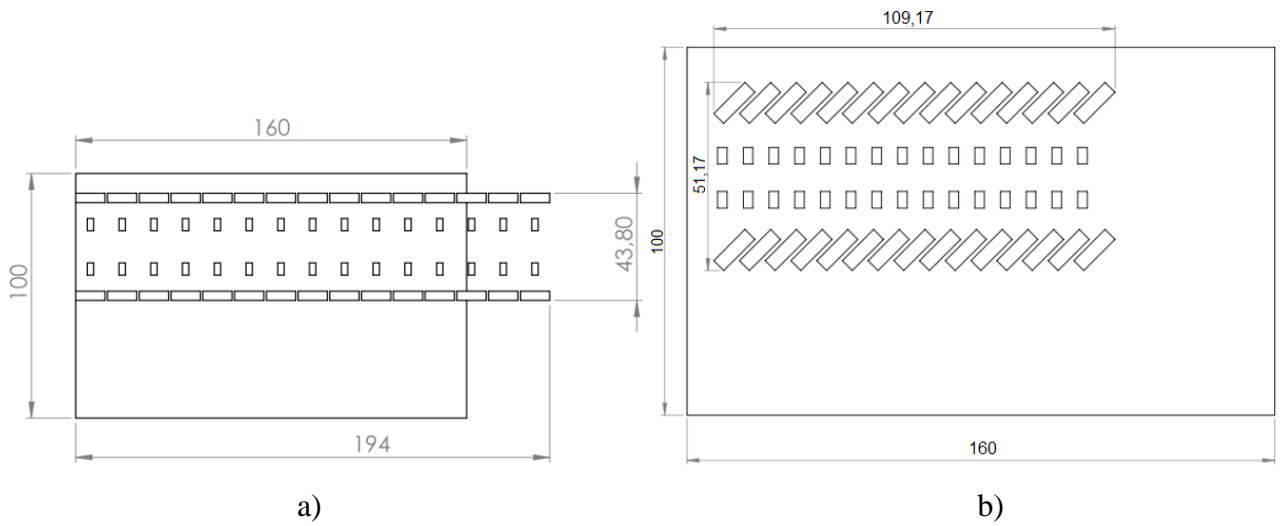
Component layout: a) Layout 1; b) Layout 2
